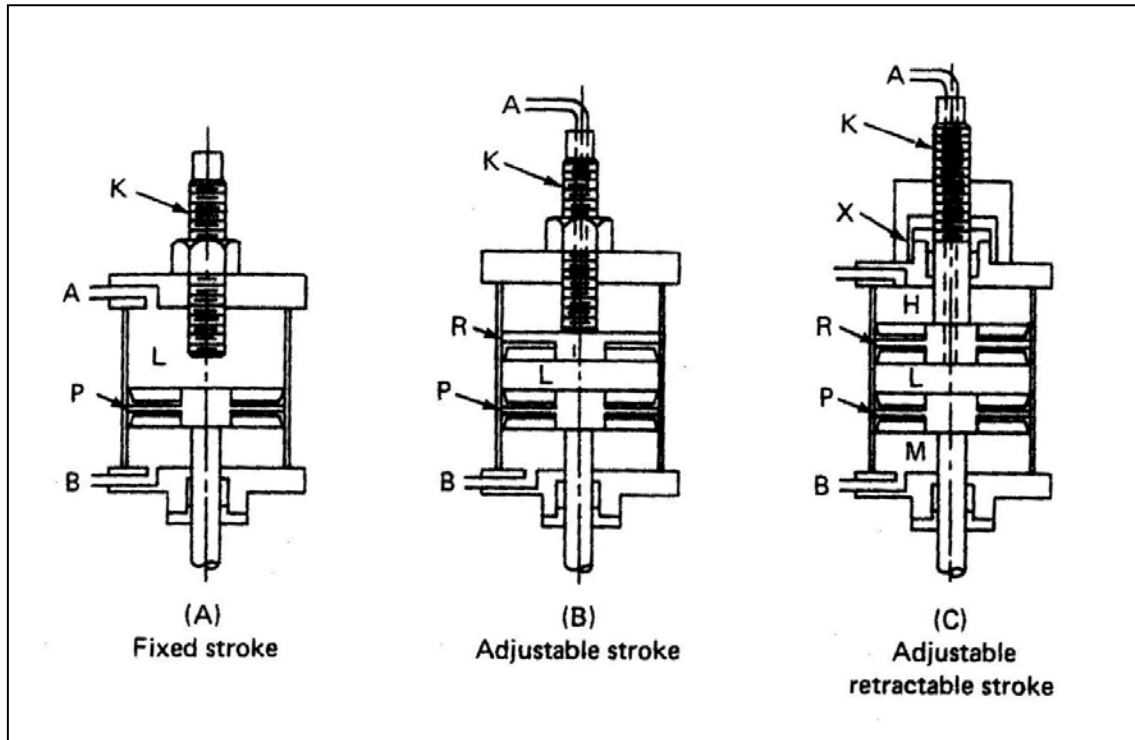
Air cylinders in resistance welding machines
